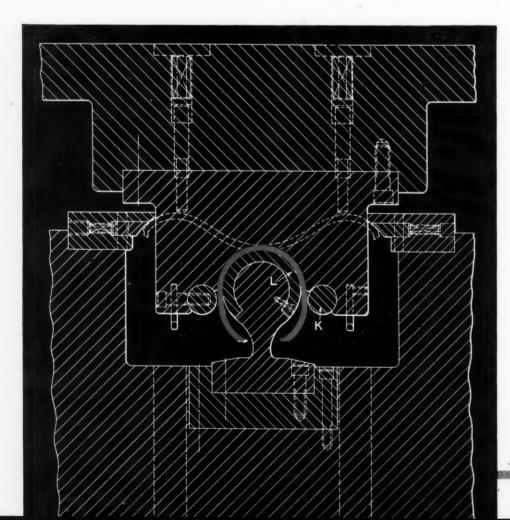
Punch and Die of Unique Construction Employed for the Second Step in Transforming a Flat Steel Strip into a Part of Cylindrical Shape
